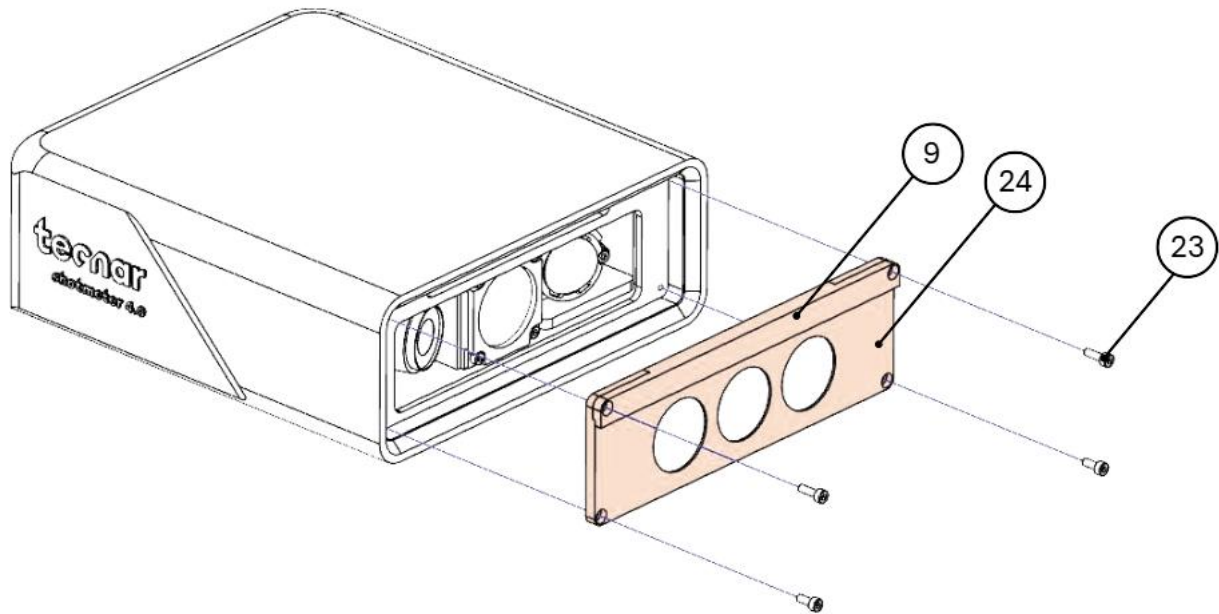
SENSOR HEAD PROTECTIVE WINDOW ASSEMBLY
